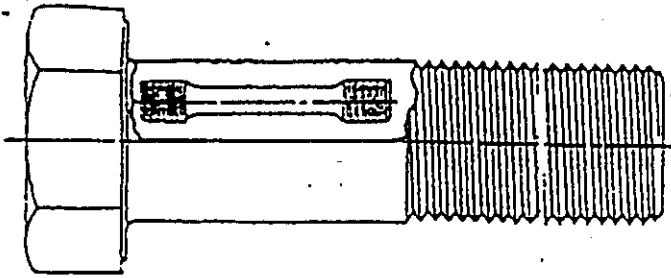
LOCATION OF STANDARD ROUND 2 IN GAGE LENGTH TENSILE TEST SPECIMEN WHEN TURNED FROM LARGE SIZE BOLTS OR SCREWS
